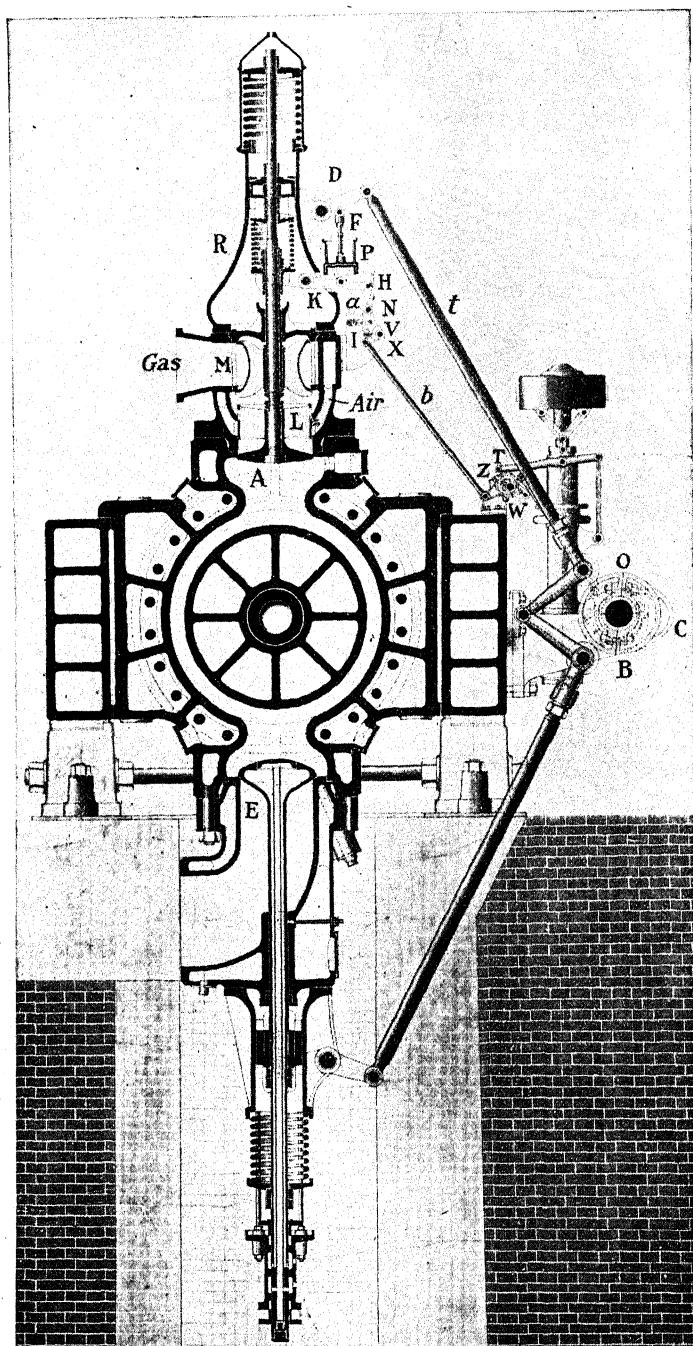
ARRANGEMENT OF PARTS OF THE COCKERILL ENGINE.
